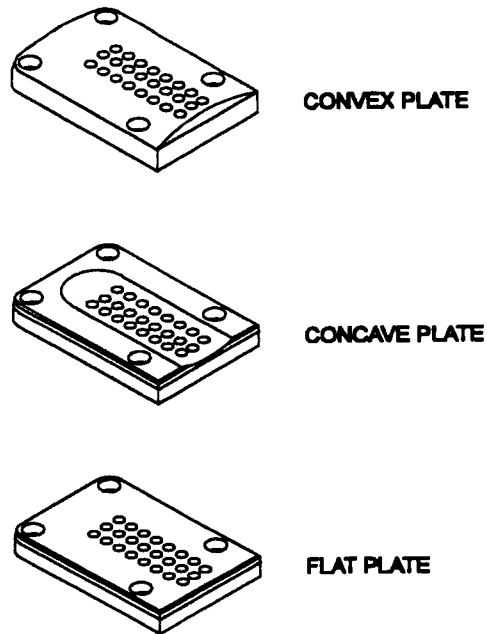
Vacuum Plate Selection including flat, convex, and concave plates.
